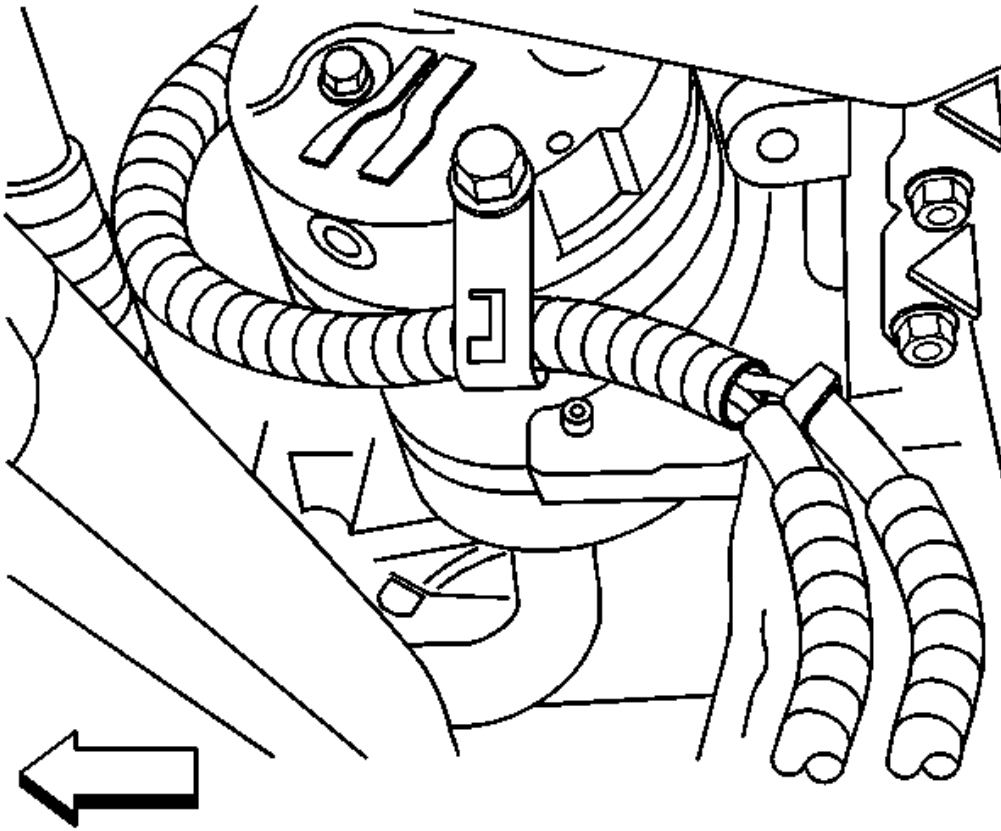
View of Wiring Harness From Rear of A/C Compressor
